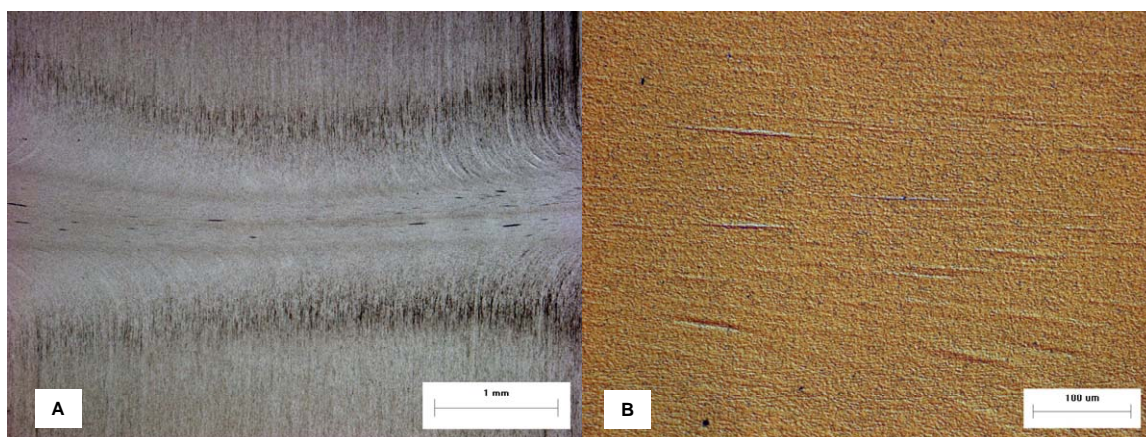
Macroscopic (A) and Microscopic (B) Bondline View of Inertia Weld Produced with High Thrust Loads and Reduced Surface Velocities
